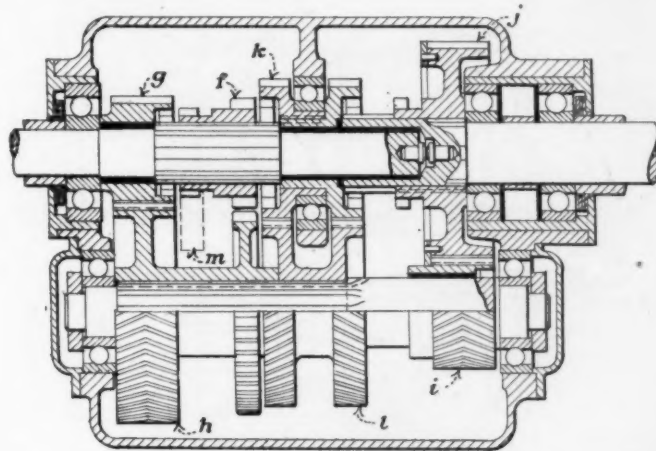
DOUBLE HELICAL GEARBOX SHOWING THE ARRANGEMENT OF THE GEARS FOR THIRD AND FOURTH SPEEDS
